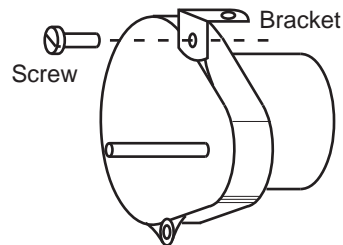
View, from the rear of the robot, of the left motor and motor mounting bracket.
